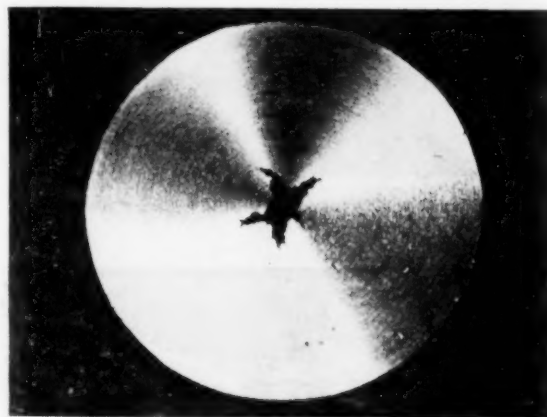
PIPE IN AISI TYPE 405 STAINLESS STEEL
